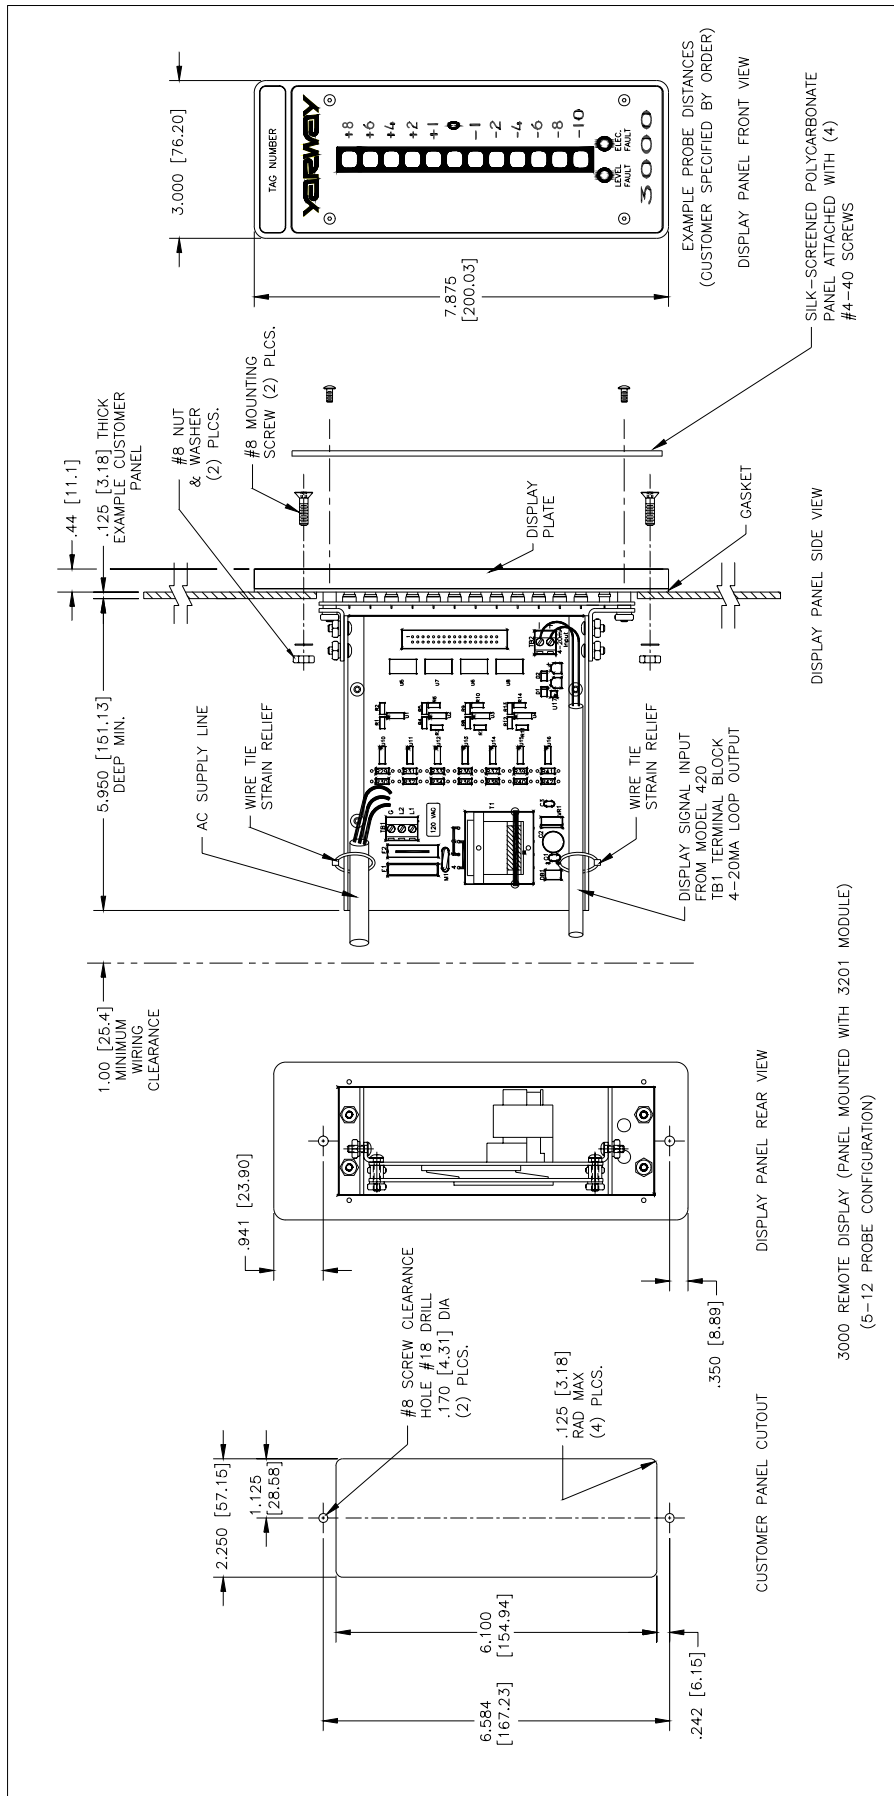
Remote Display – Panel Mount Full-size 5-12 Probe
